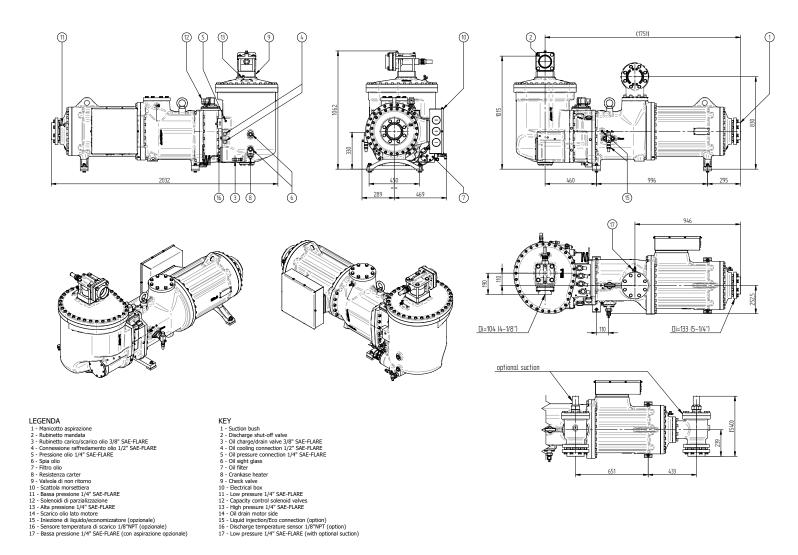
dimensional drawing of the models: RS5-L270/L300/H350/H400 (drawing code: MSIXXX-XX);
